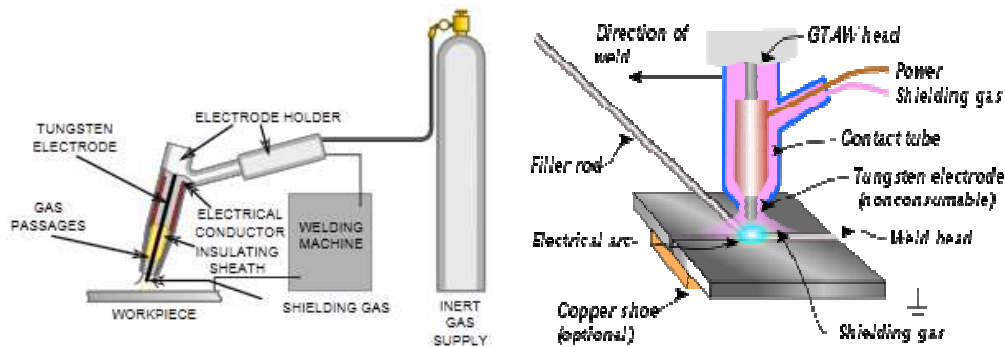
Gas Tungsten Arc Welding (GTAW) Process
